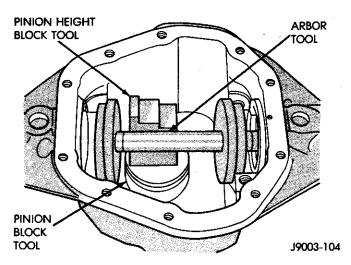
Pinion Height Block Tool Against Arbor Tool
